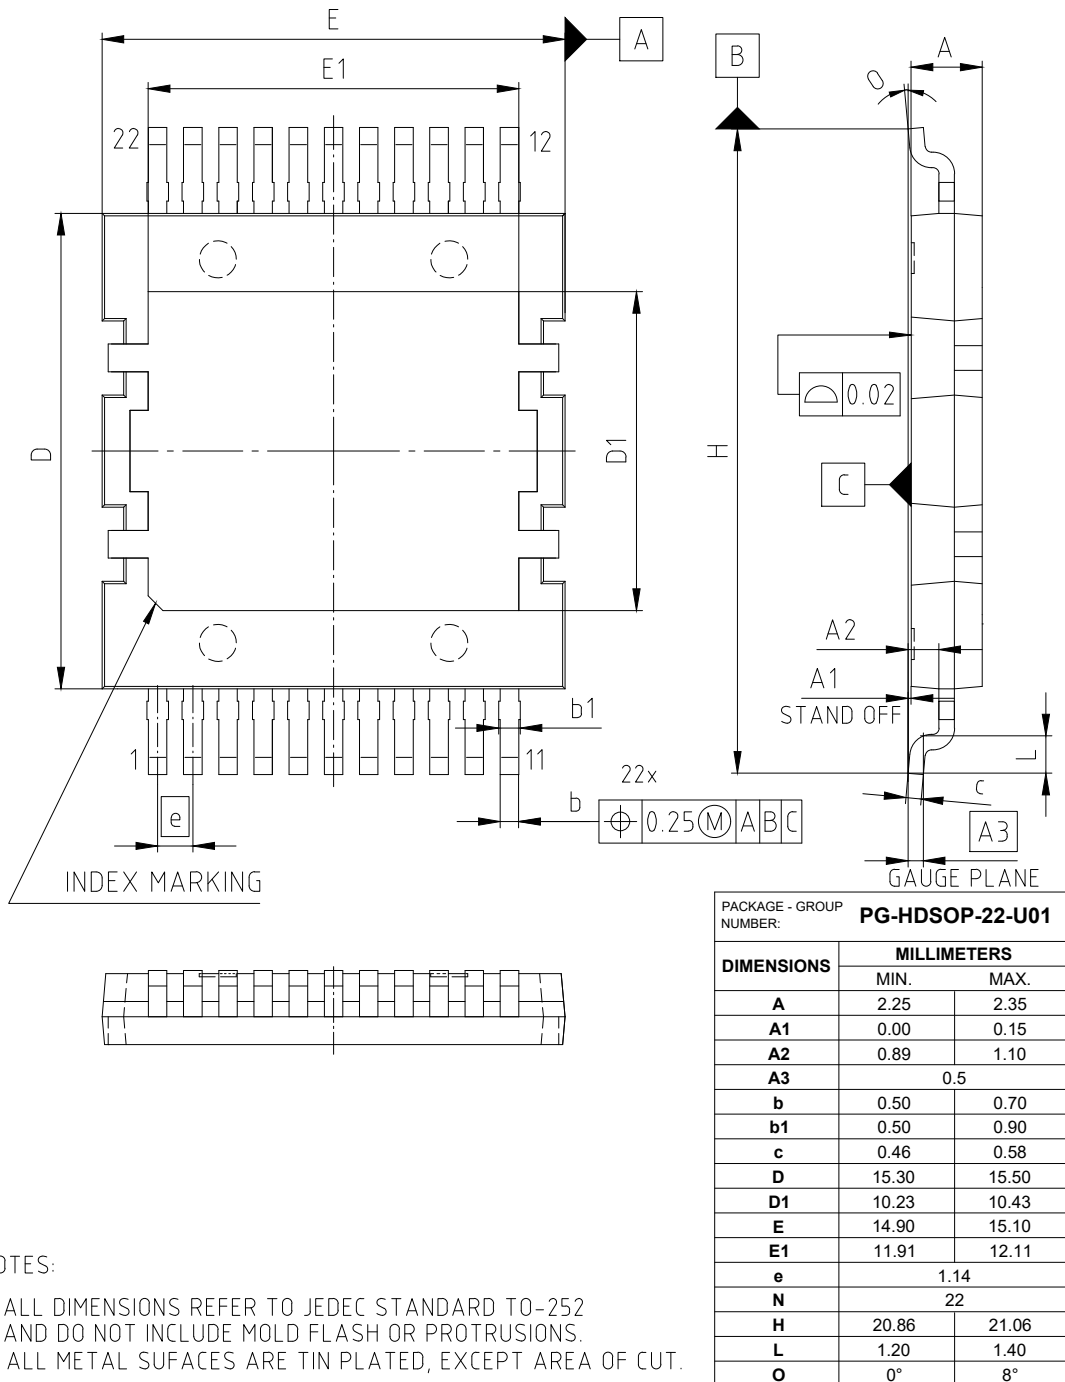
Outline PG-HDSOP-22, dimensions in mm
